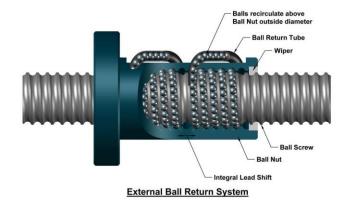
Typical Ball Screw Design Example Source:https://johnsmachines.com/2016/05/23/lath e-conversion-to-cnc-3-ball-screws/
